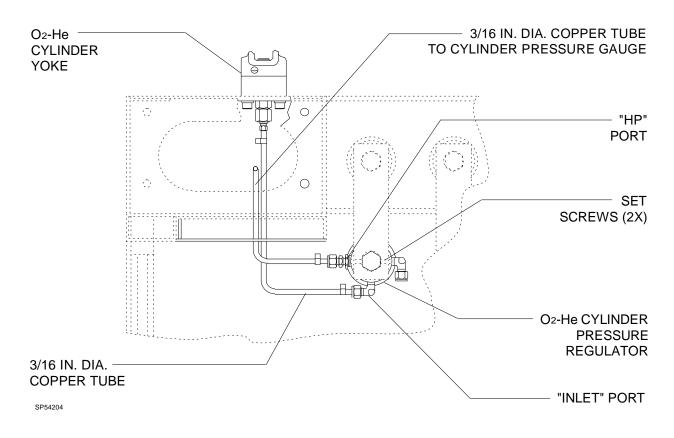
O<sub>2</sub>-He CYLINDER REGULATOR MOUNTING AND H.P. CONNECTIONS
